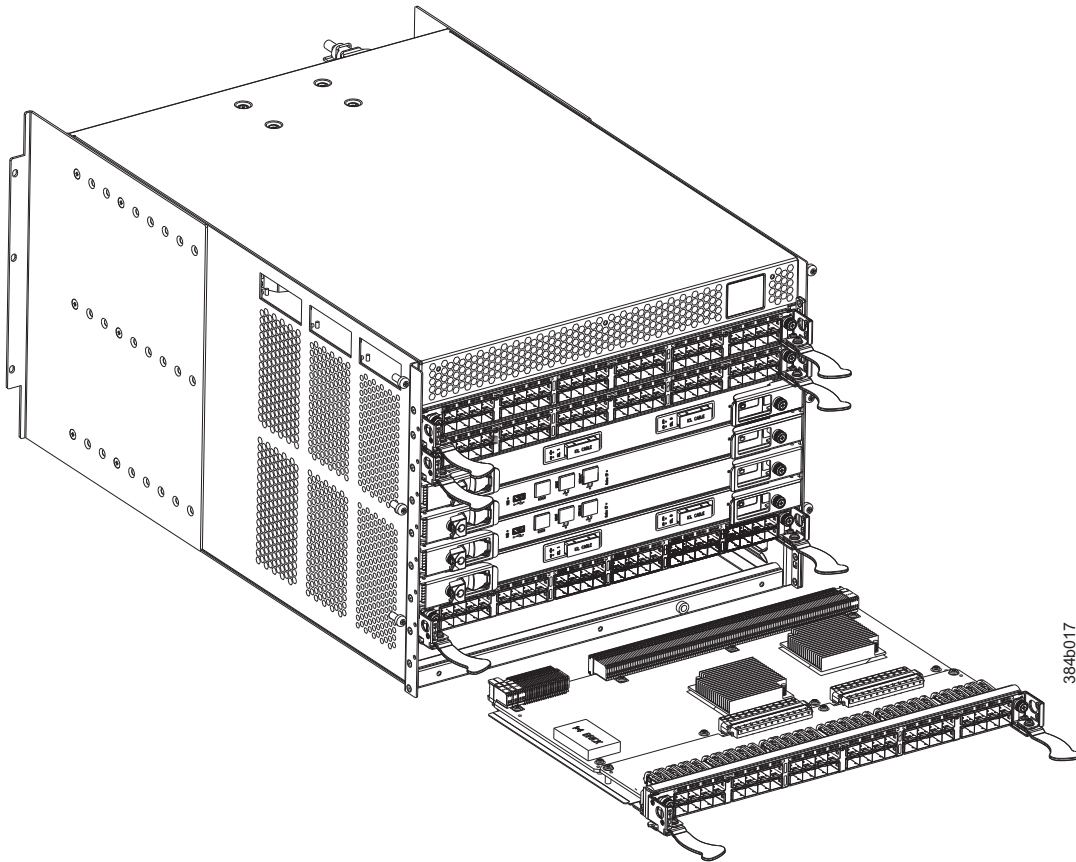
Removing a blade from a 2499-416 chassis (FC8-48 port blade shown)
